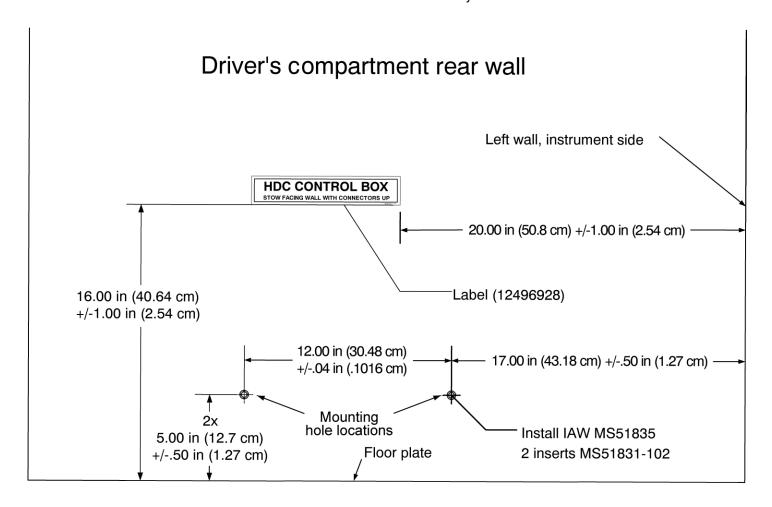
Mounting Hole Locations for Control Box Stowage Fixture
